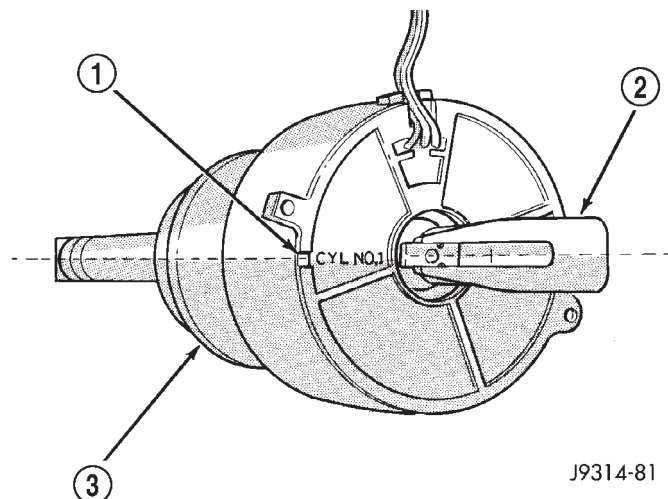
Rotor Alignment Mark—3.9/5.2/5.9L Engines
